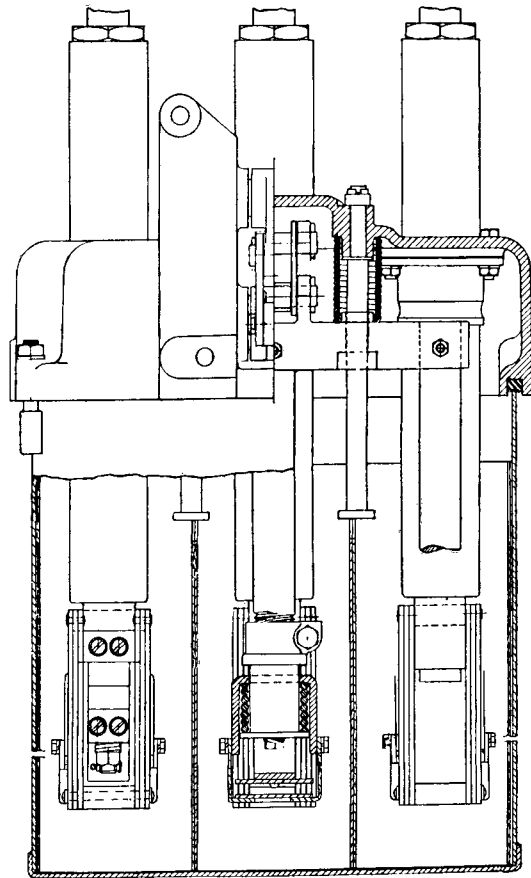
THREE-POLE BREAKER UNIT—FRONT VIEW
